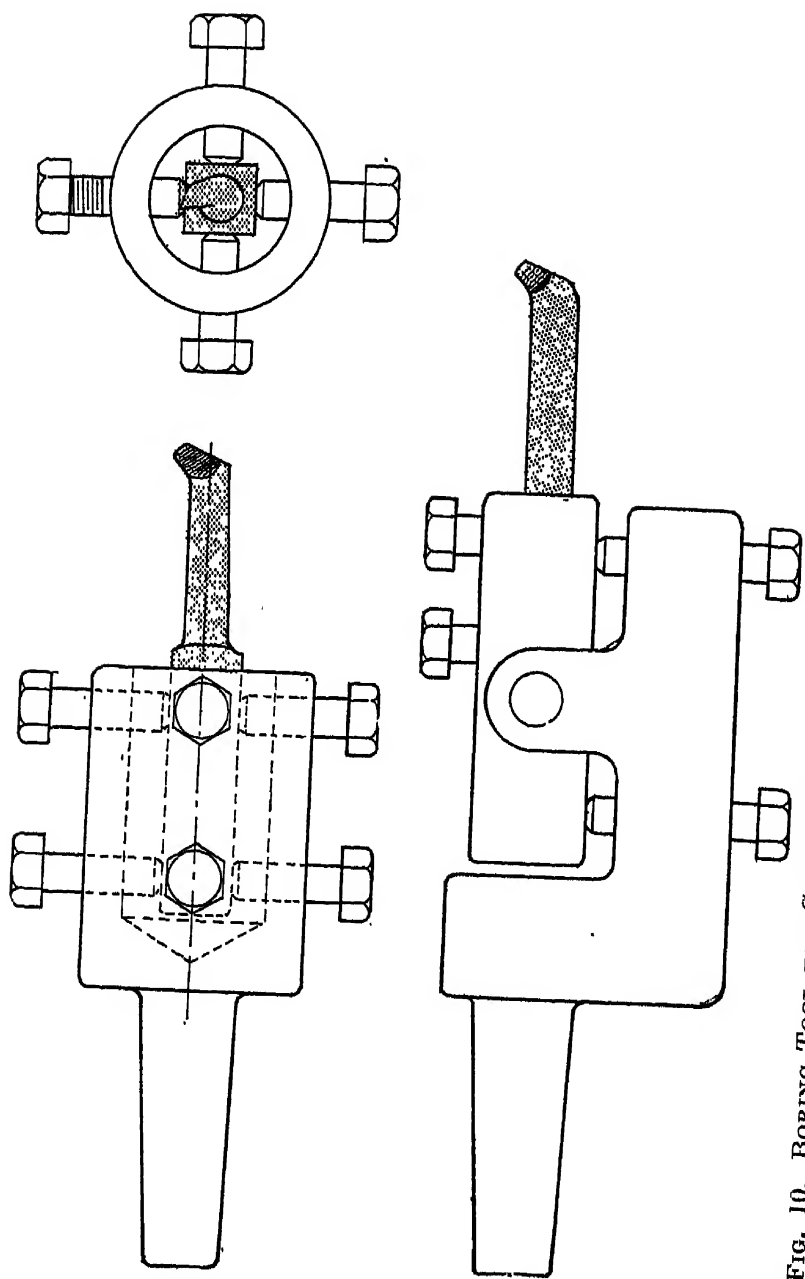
BORING TOOL FOR CORRECTING POSITION OF HOLES IN DRILLING JIGS, FOR USE IN A MILLING MACHINE
